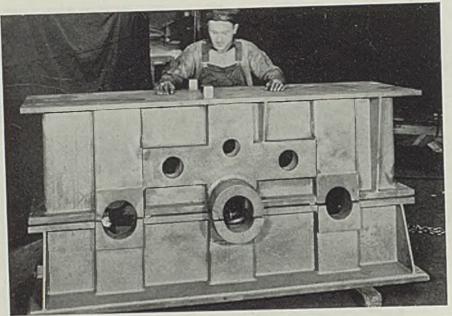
Gear case fabricated by welding. Cost summary sheet shown in Fig. 3
